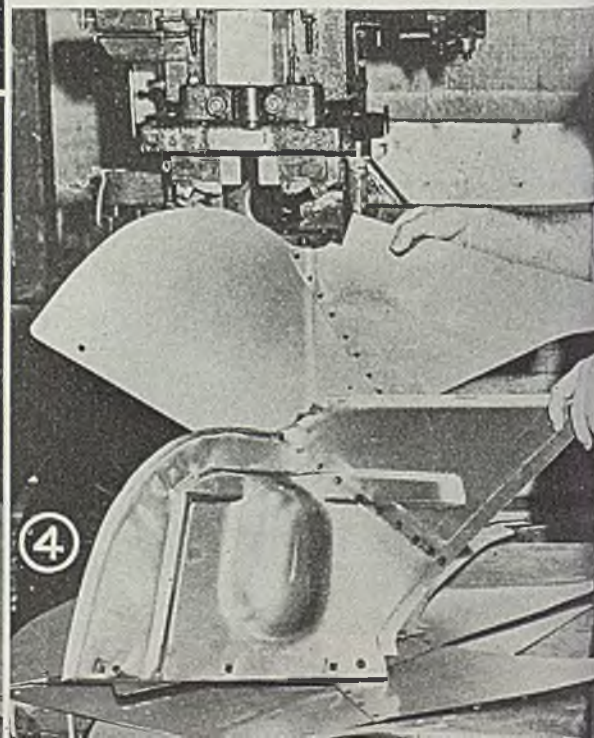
All flat scrap pieces from fender blanks are saved and sorted to be drawn into smaller parts
